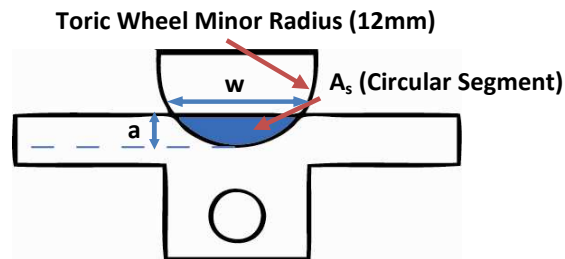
Diagram of Wheel Intersecting with Workpiece
